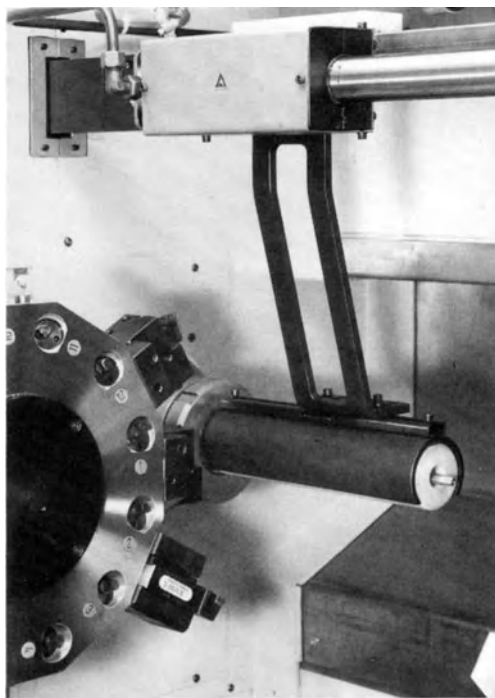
A part-catcher partially supporting the workpiece and minimising damage whilst the parting-off operation is undertaken. [Courtesy of Gildemeister (UK) Ltd.]
